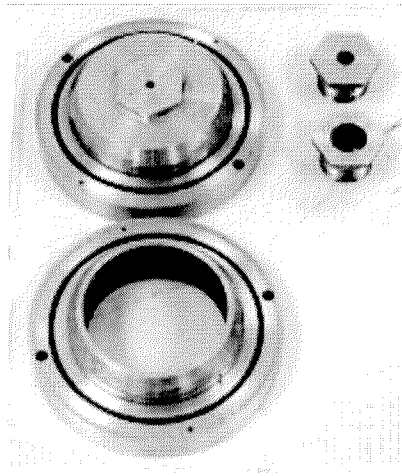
Threaded nozzle adapter with nozzles, and 3.625" (92-mm) nozzle.
